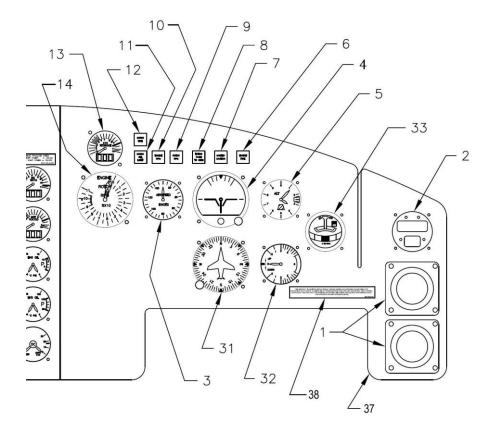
Eagle Single Instrument Panel (Page 2 of 3) (All S/Ns except 30817, 30687, and 30599)
